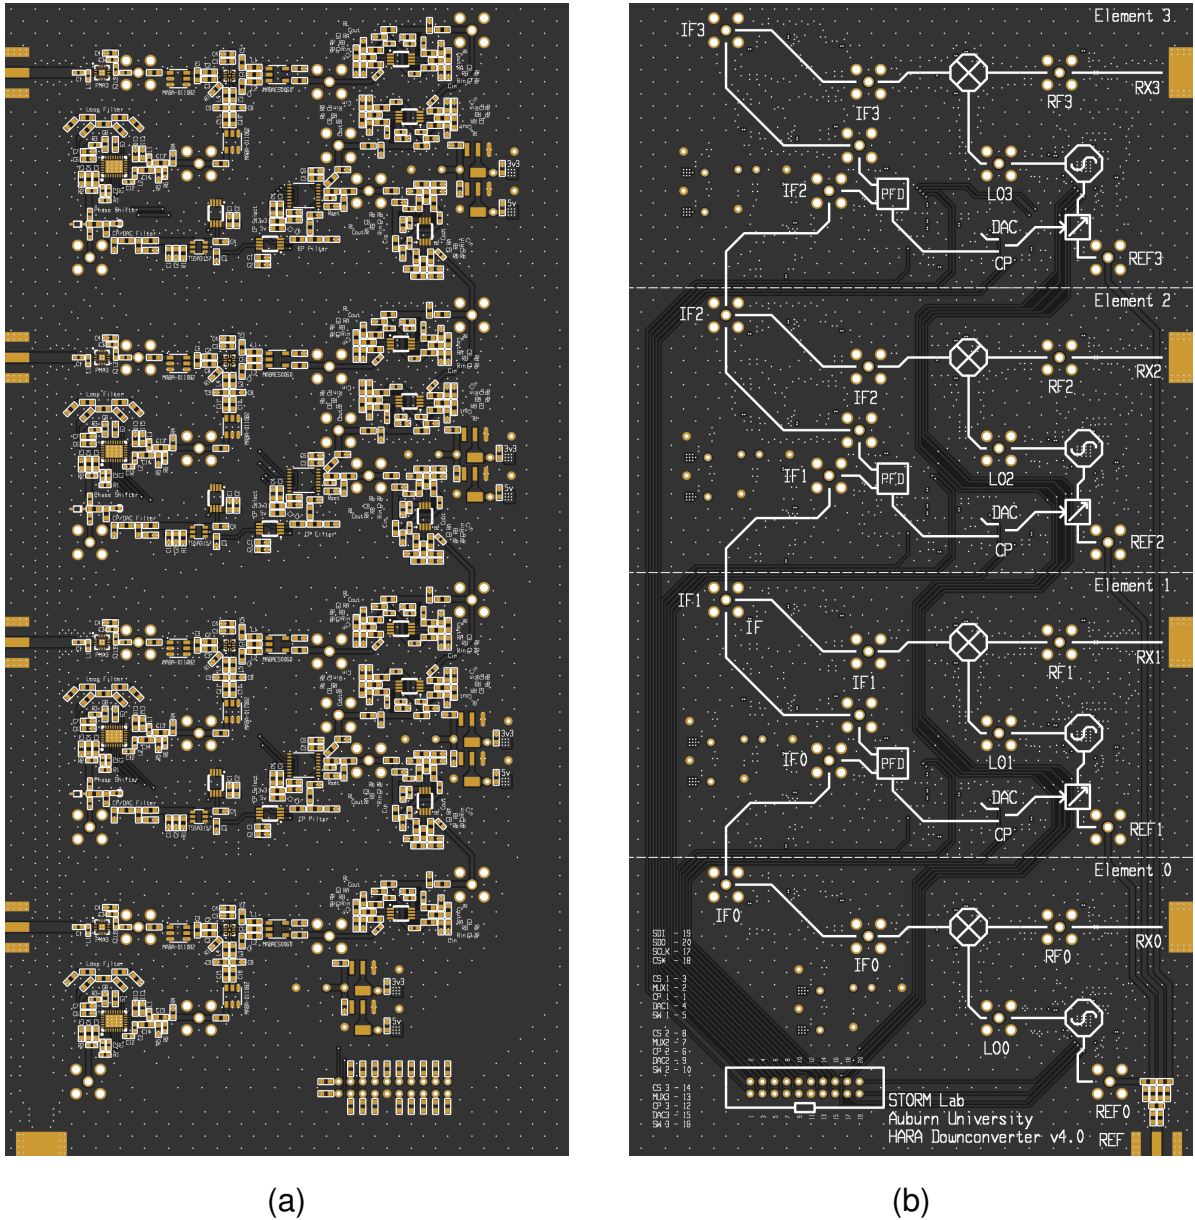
DLL-HPC received signal beamformer PCB renders (a) front (b) back
